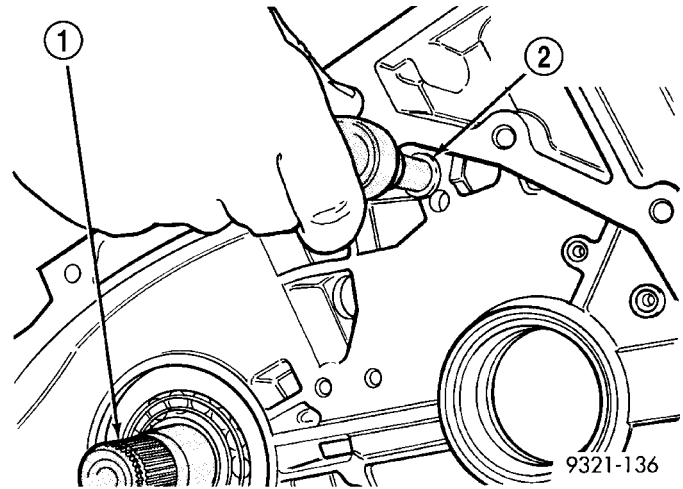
Remove Parking Sprag Pivot Retaining Screw
